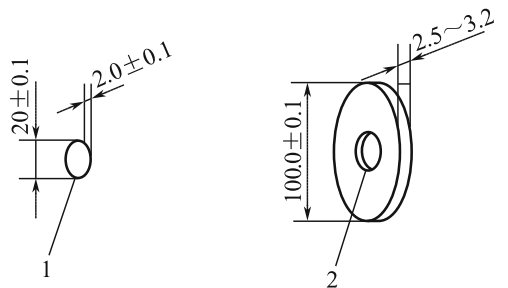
Specimens 1—tightener combined with mounting screw; 2—tightener combined and concentric with mounting shaft
